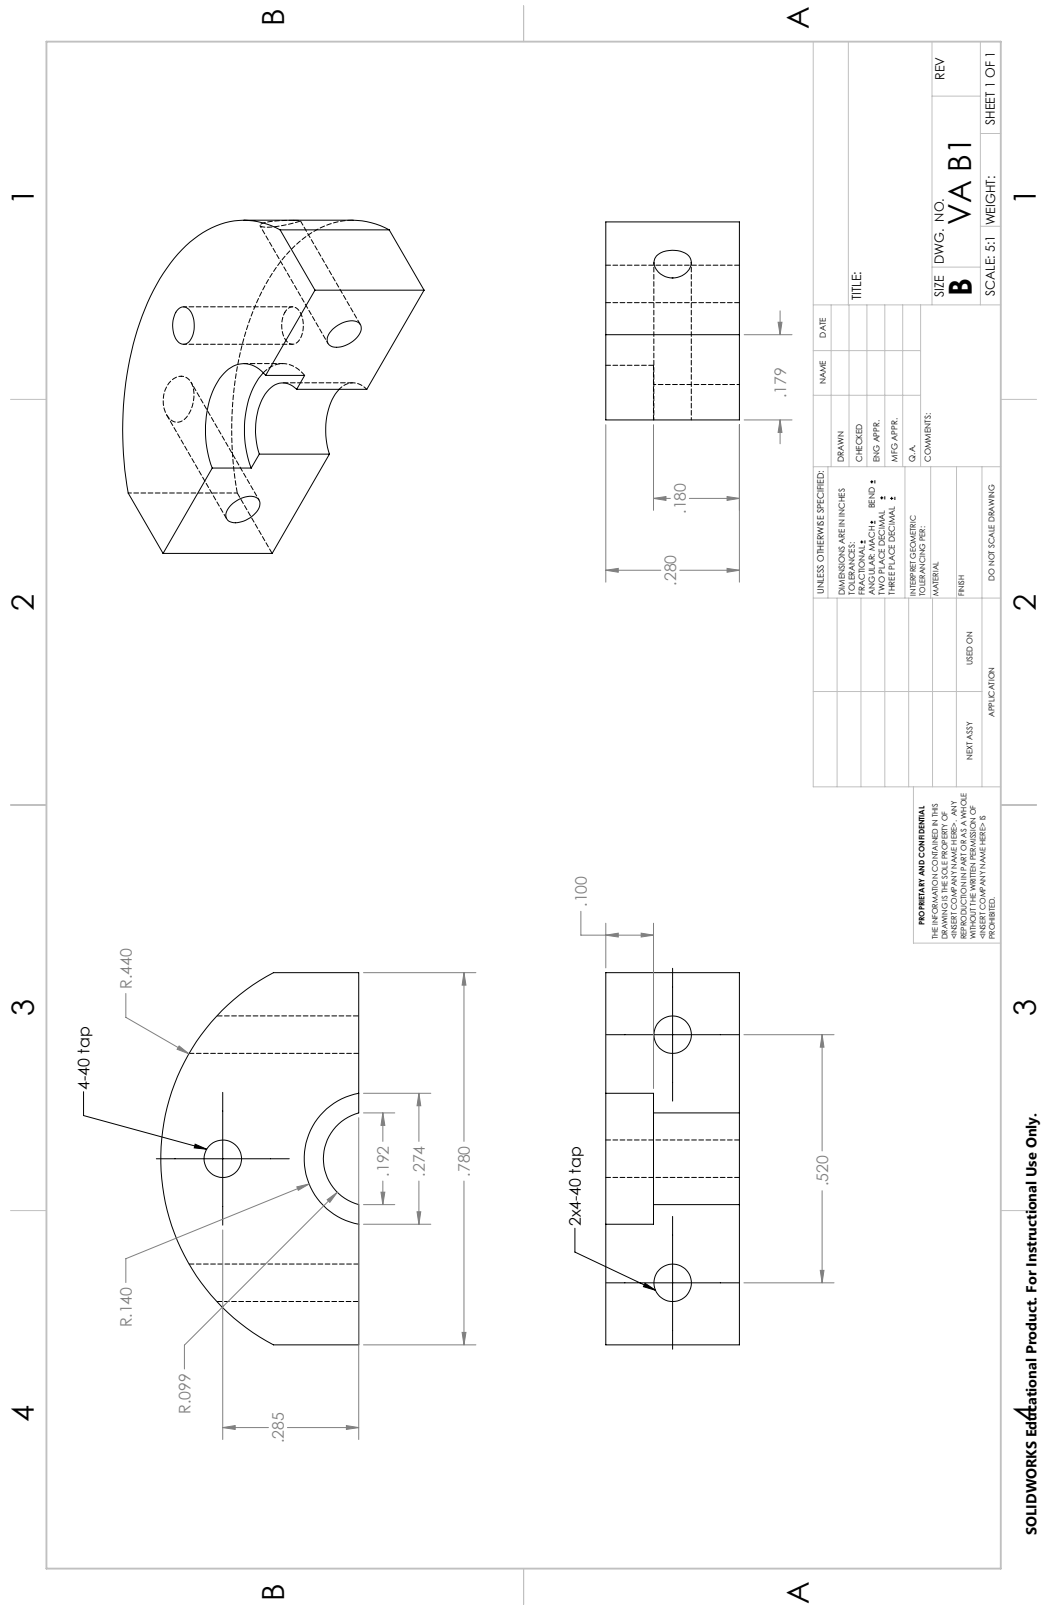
First of two bottom components of the custom valve adapter assembly.
